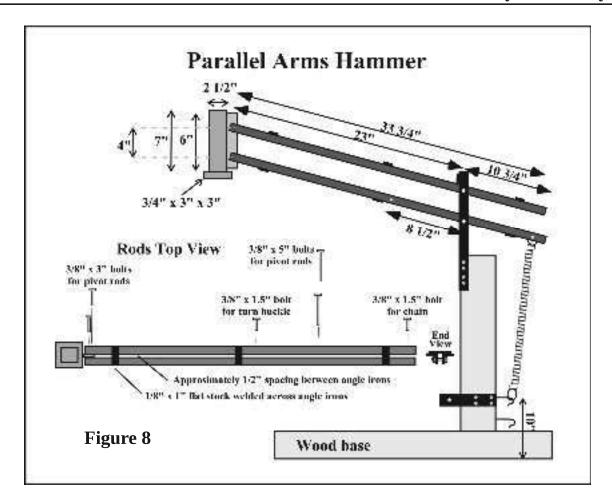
shows my variation on this treadle hammer to create one with the hammer unit mounted on parallel rods. The parallel rods are each made from two pieces of 1/8" x 1" x 1" angle iron welded together using three pieces of 1/8" x 1" flat stock. Figure 8 shows the lengths and sizes of each piece. Two 3/8" x 3" bolts are used to pivot the hammer unit on the rods. Two 3/8" x 5" bolts provide the pivot for the rods to the base. A 3/8" x 1 1/2" bolt provides a place to hook the turn buckle and chain and another at the end of the rods provides a place to connect a quick link to attach the spring. In this version the spring was connected to a screw hood 10" from the floor. There is approximately 1/2" spacing between each pair of angle irons. Washers were used as spacers at the hammer end to produce a tight link so the hammer did not wobble.
